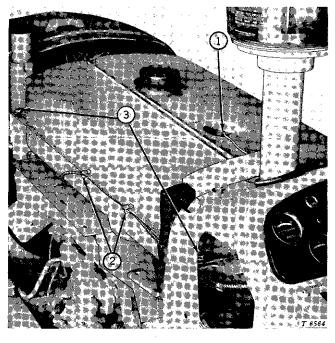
Fuel Tank Attaching Points (Gasoline Illustrated)
